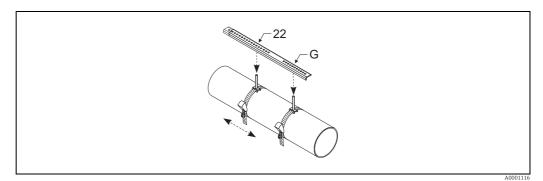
Determining the distance in accordance with the mounting rail (e.g. POSITION SENSOR G22)
